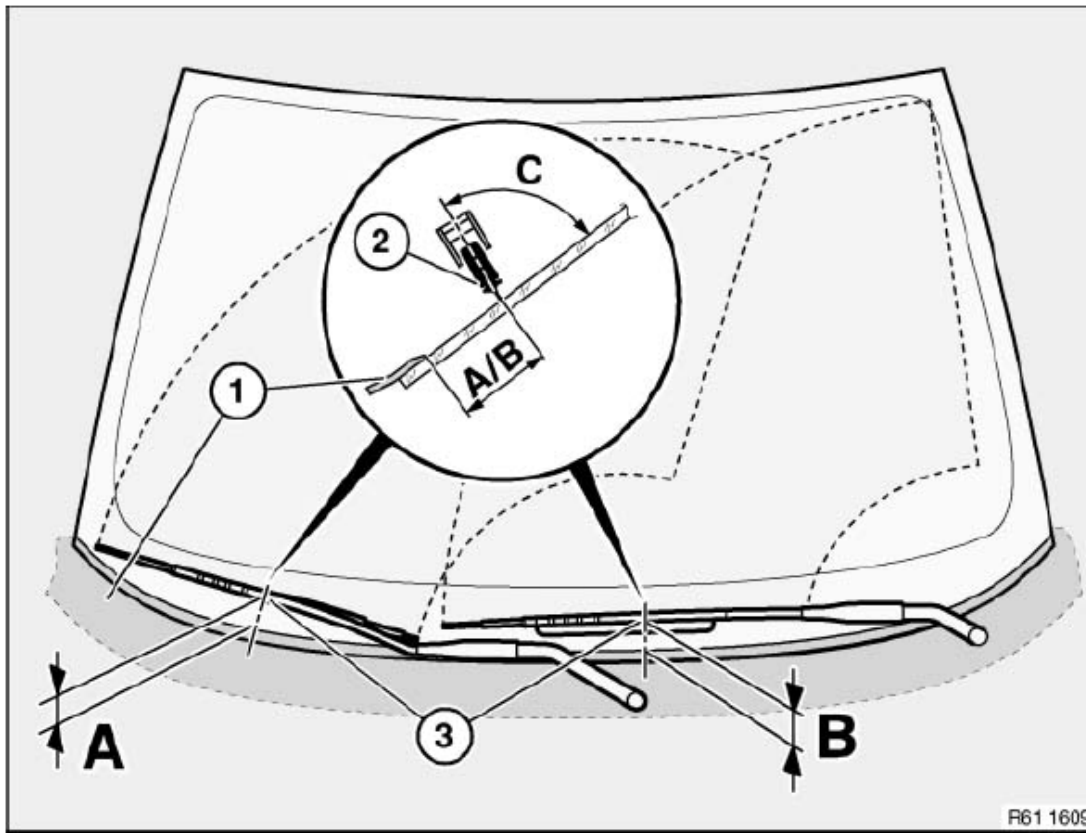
Identifying Distance Between Windscreen Wiper Blade And Trim Panel
